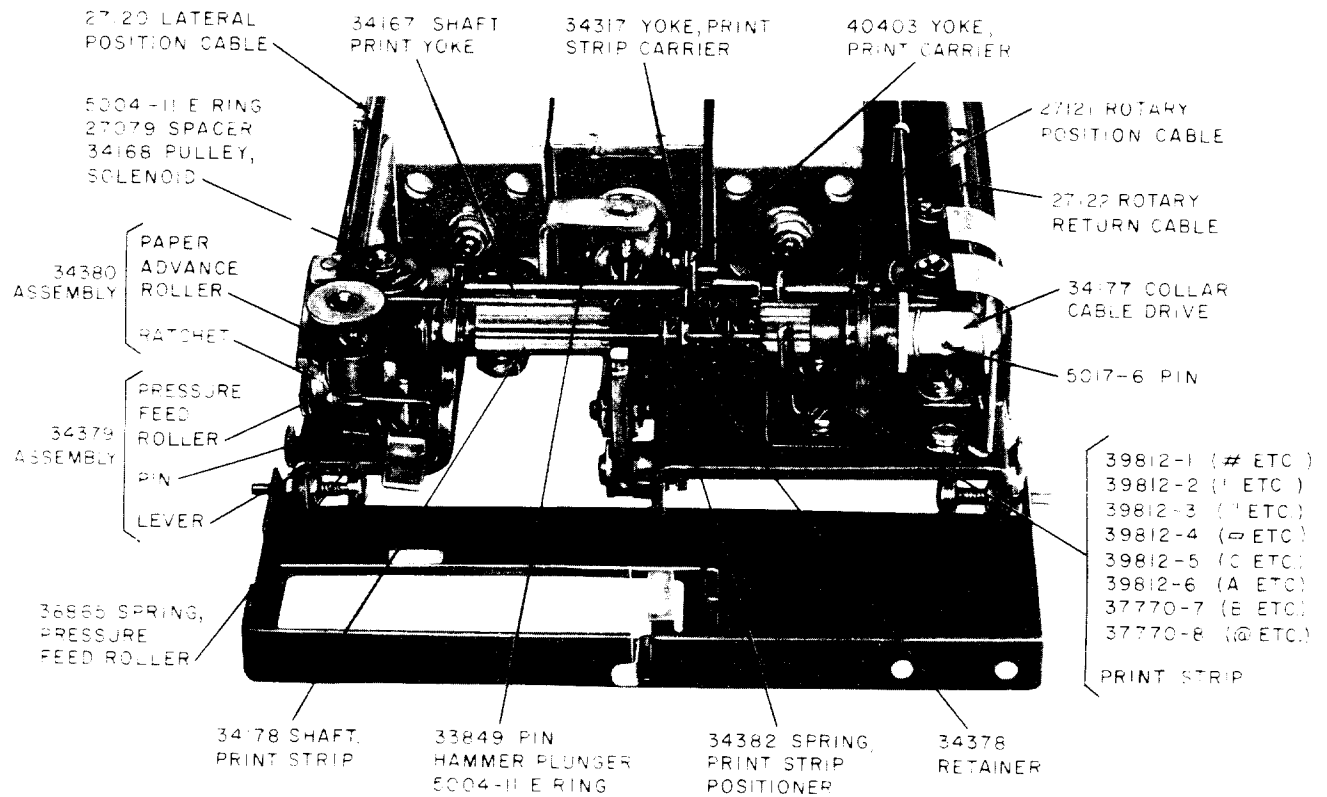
KS-19717 L6 Tape Printer Showing Print Segments
